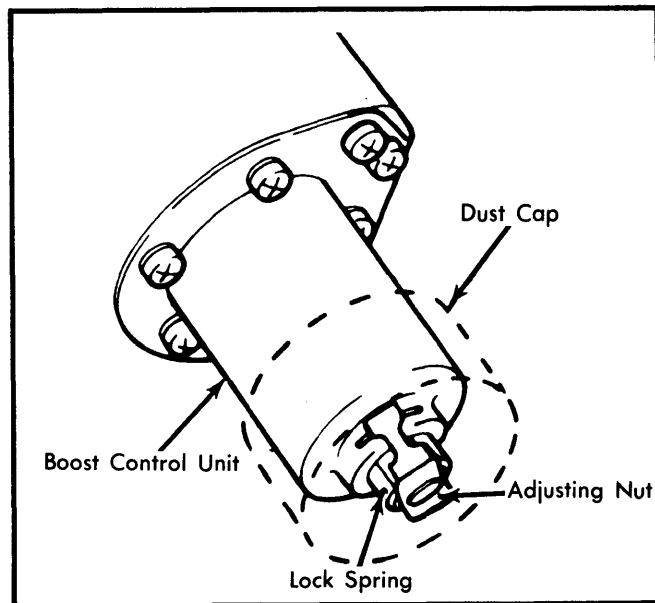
Adjusting Boost Control Unit Operating Pressure
